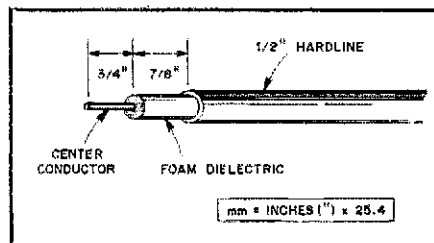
Dimensions for preparing the end of a Hardline cable for installation of a home-made connector. Remove an additional 3/16 inch of jacket for the connector that includes the center nut from the fitting.
